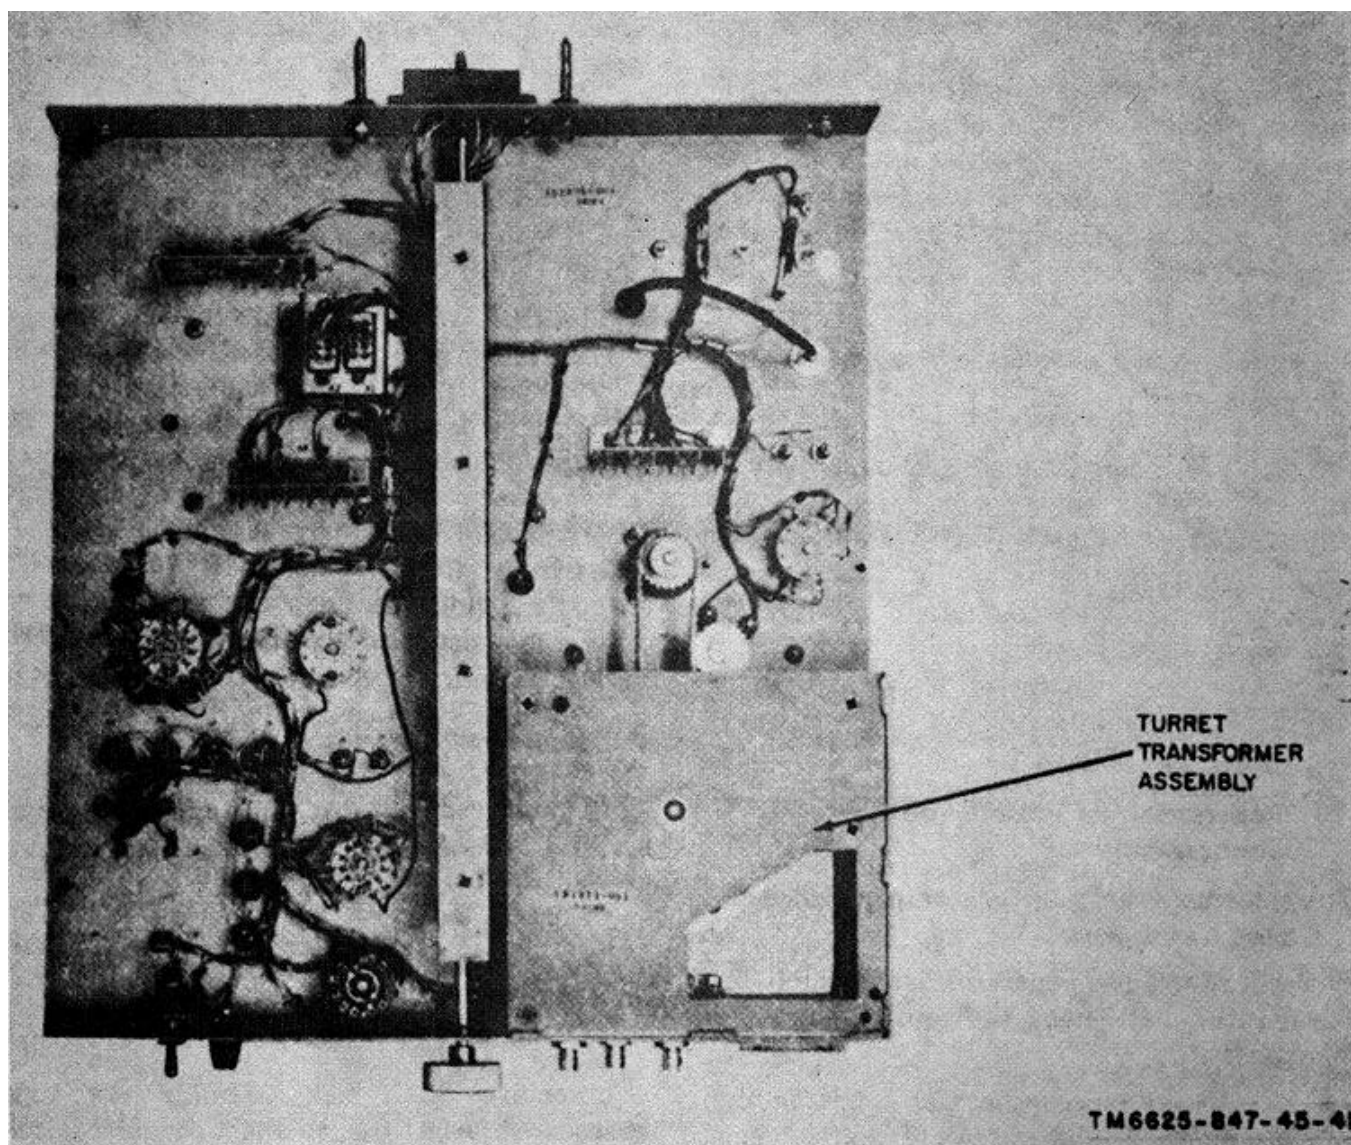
Driver, discriminator, and antenna coupler tray A1A5, subassembly location.
